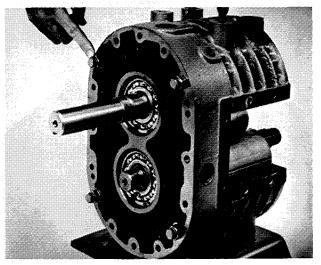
TWO CAPSCREWS WITH SPACERS USED TO TEMPORARILY FASTEN UPPER HOUSING HALF TO DRIVE END PLATE
